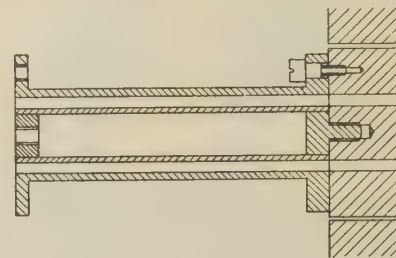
Section through a standard capacitor and the bridge terminals.
